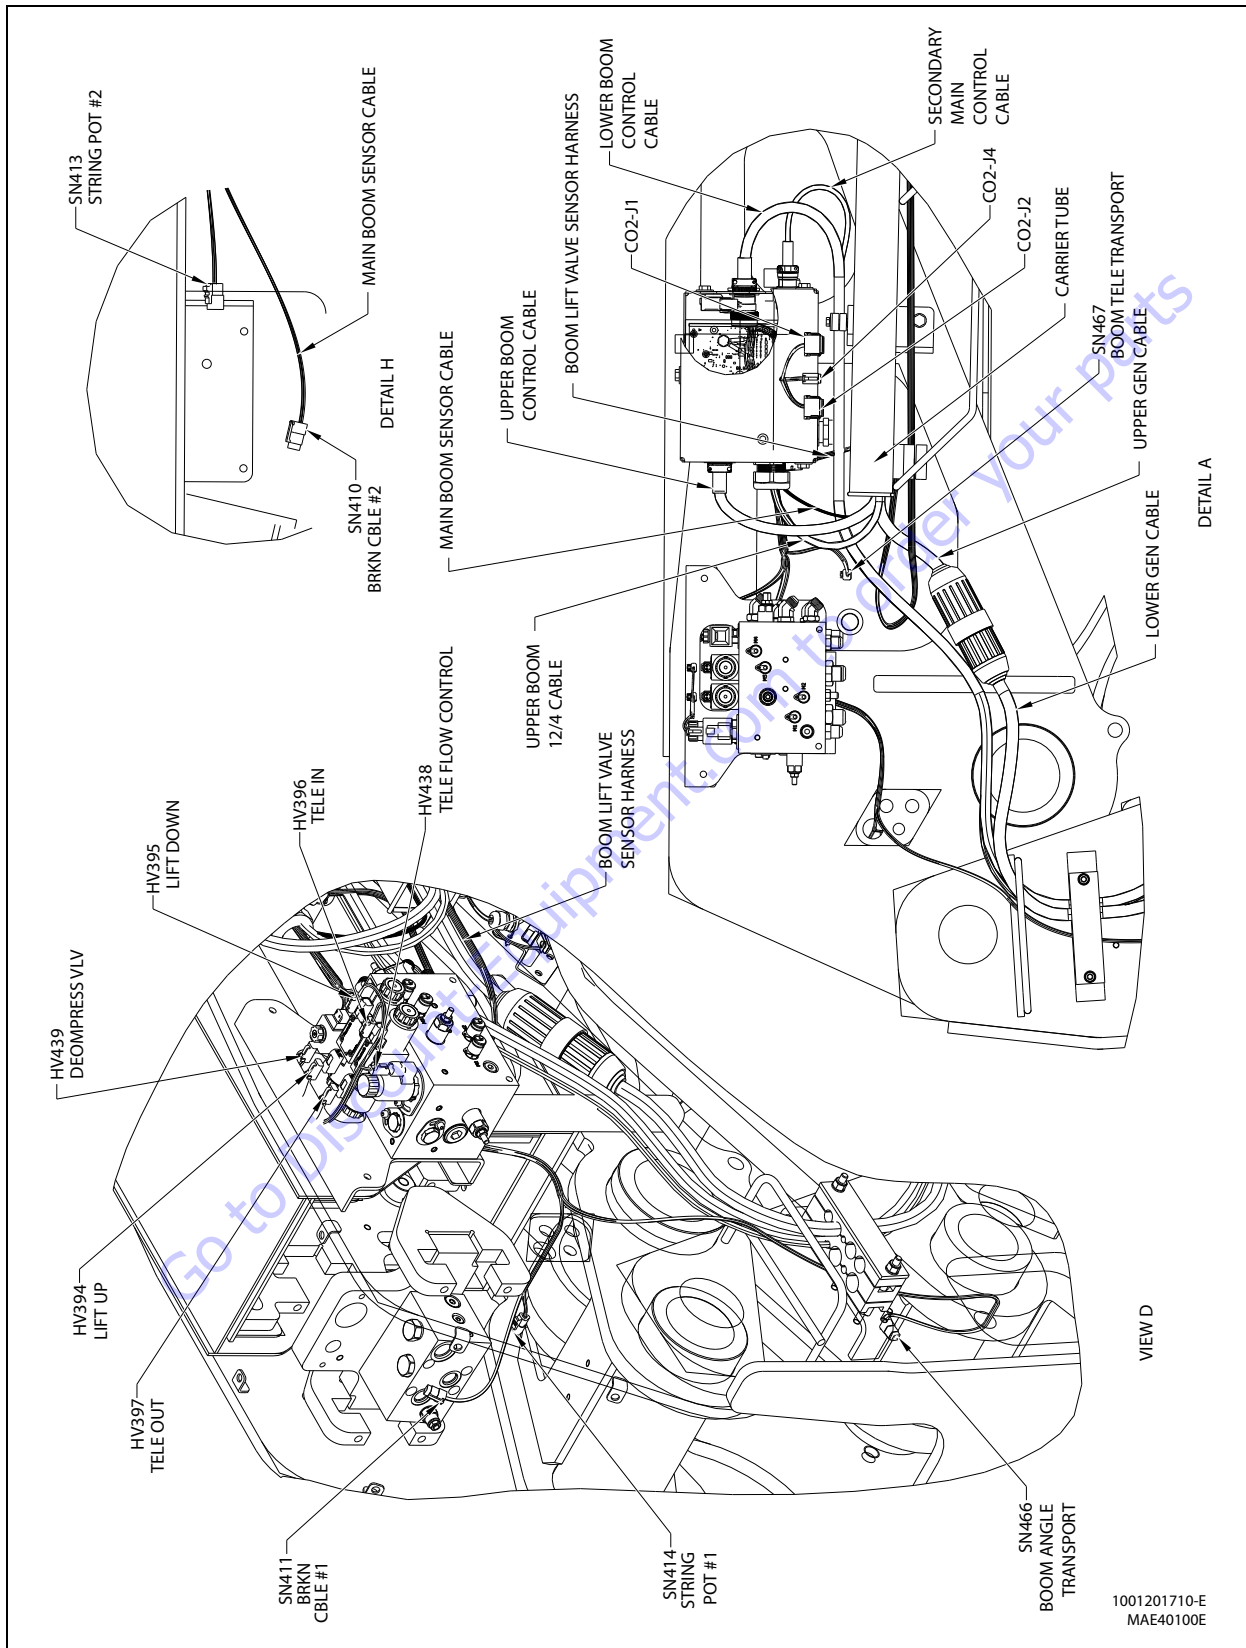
Boom Electrical Installation (4000W Generator) - Sheet 3 of 5
